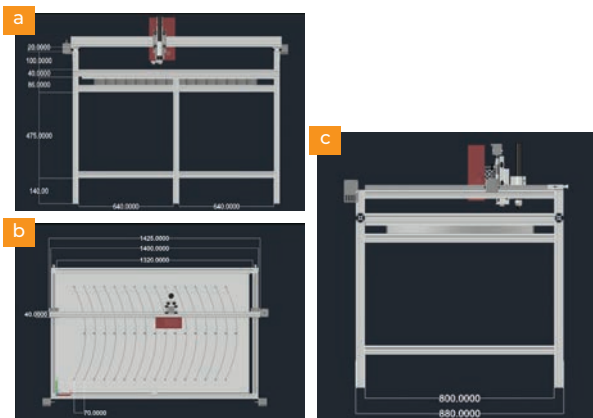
Conceptual Design with dimensions of the CNC Plasma Cutter with Ink Marker – with measurements (a) Front view (b) Top view (c) Side view
